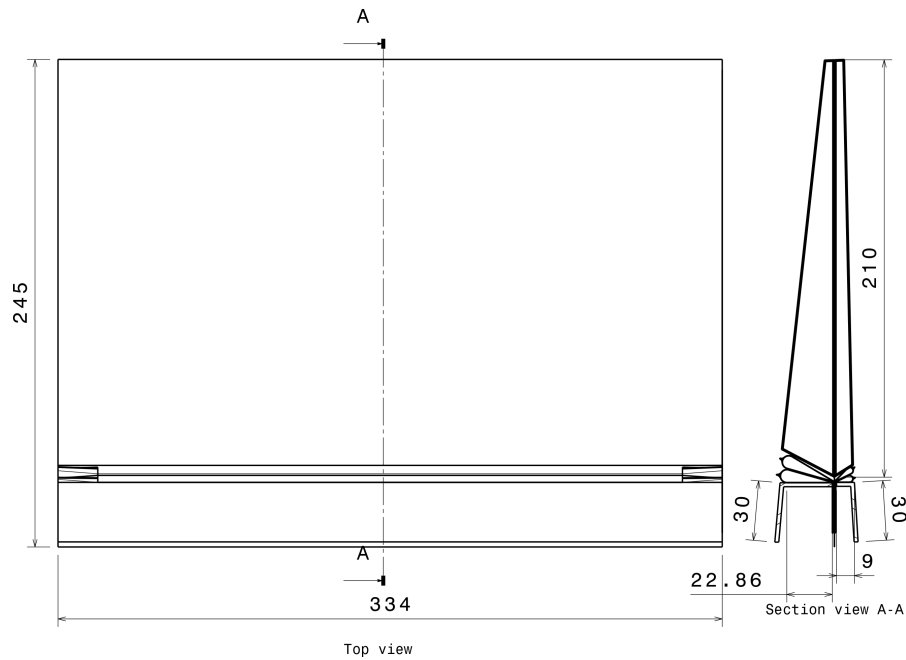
Top and section view of the actuator with dimensions in [mm] and [deg]
